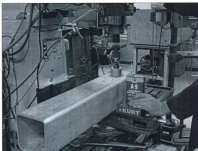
Machining the pressure sensing plate installation hole for the calibration tower.
